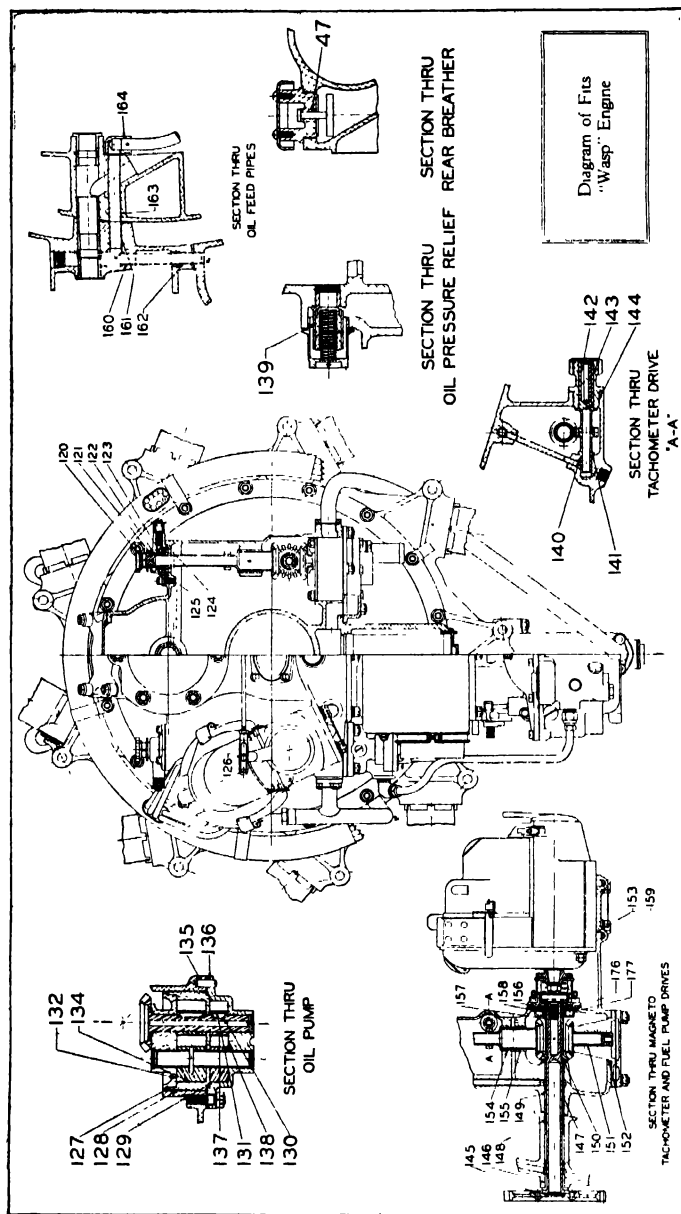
Sectional Diagrams of "Wasp" Engine Parts Giving Key Numbers to Accompany Tabulation of Fits and Clearances in Text.
